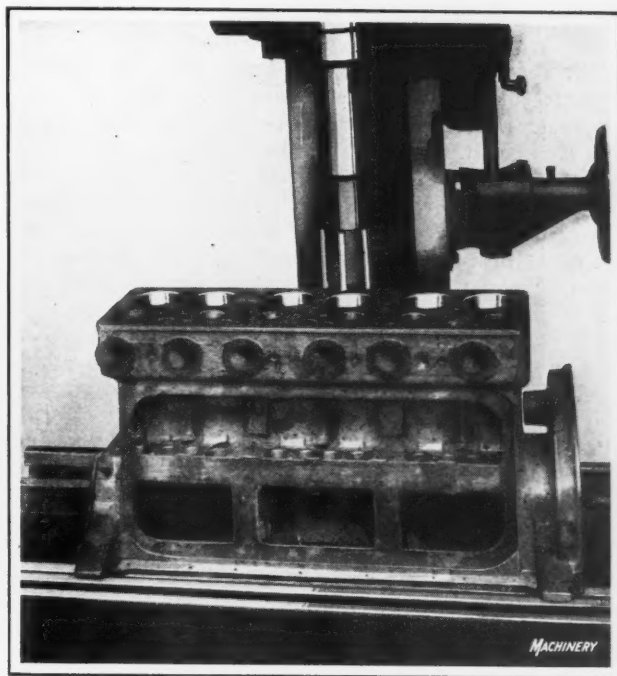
Size-reaming Cylinder Bores under a Single-spindle Drill
